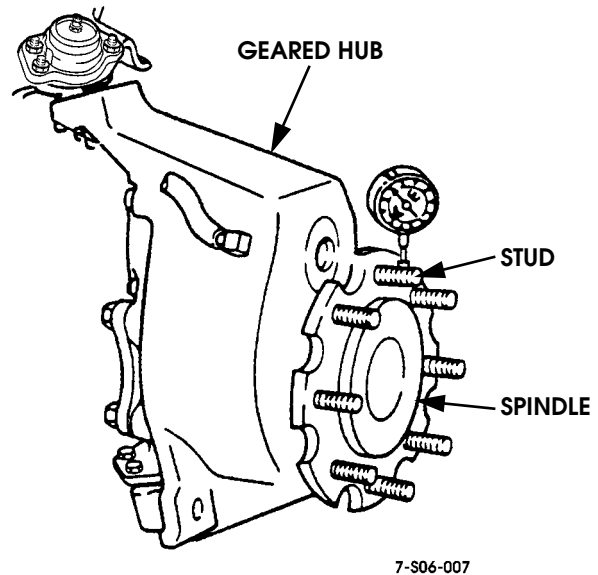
Geared Hub Spindle Stud Runout Inspection
